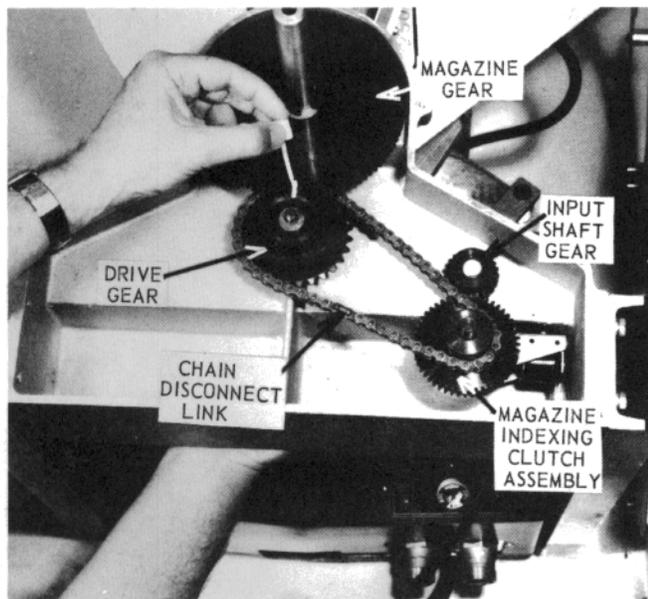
Match Marking Magazine Gear and Magazine Drive Gear
